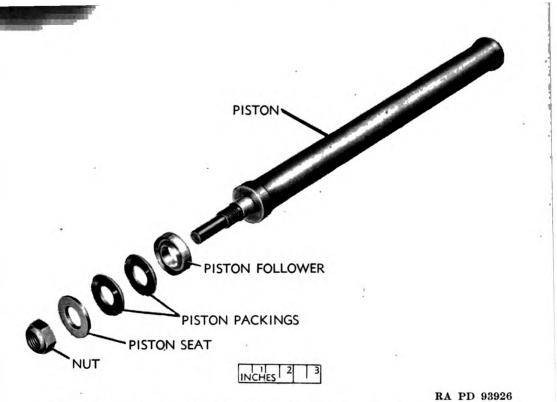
20-mm hydraulic charger M5—Parts of piston assembly.
